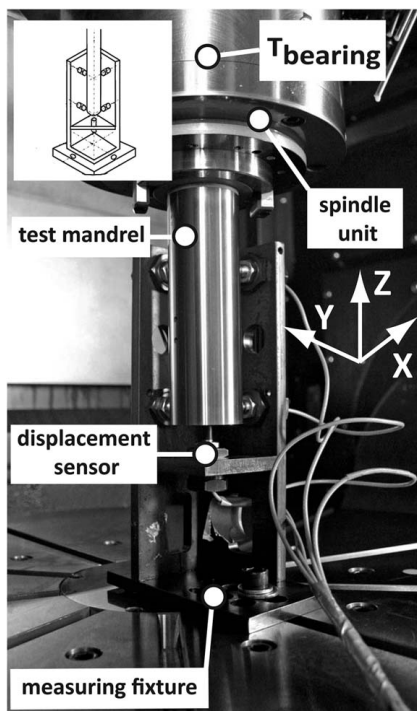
Experimental setup per ISO 230-3 and implementation in a five-axis CNC machining center
